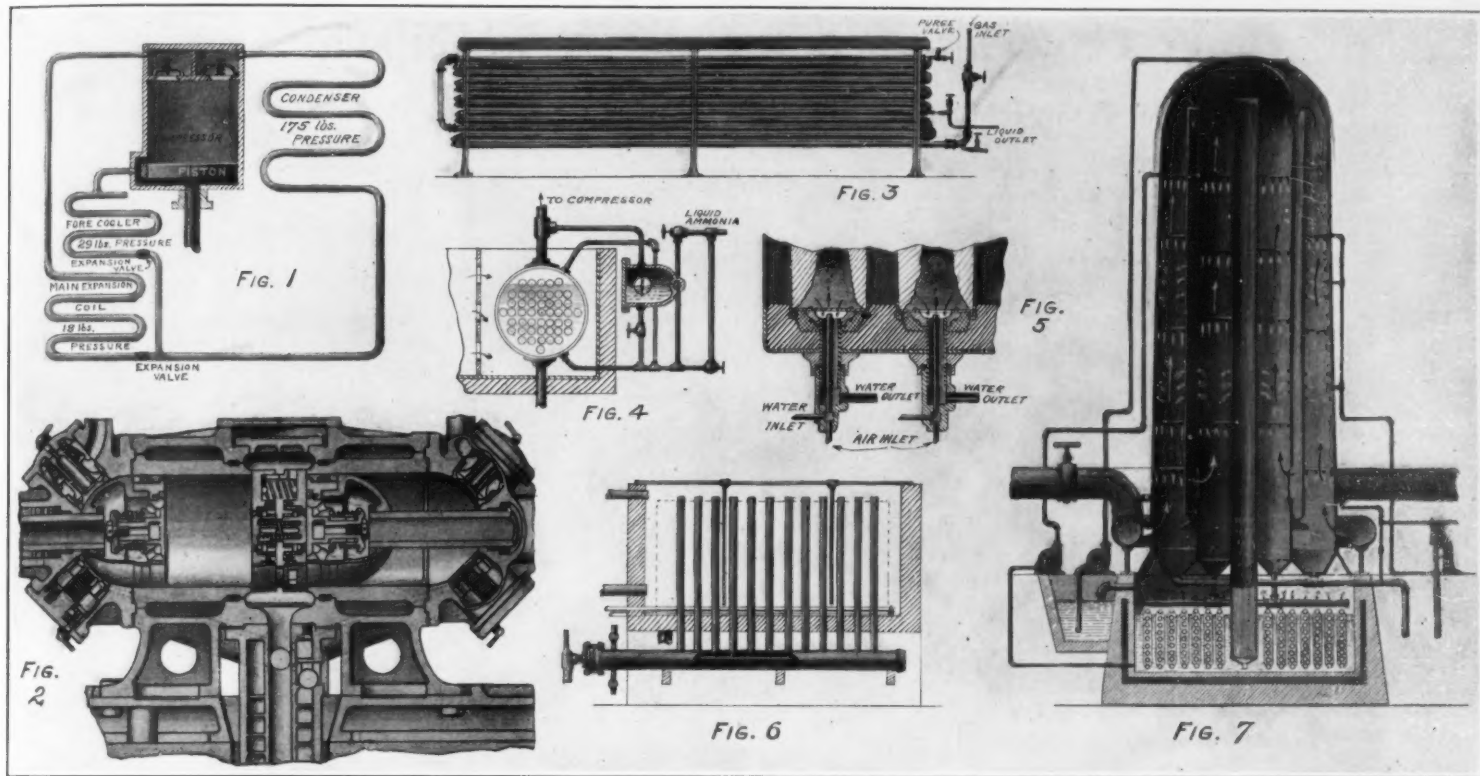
Diagrammatic view of a compression system, consisting of four main parts—compressor, condenser, expansive valve, and evaporator or refrigerator coil. Fig. 2.—Quadruple acting compressor, showing housing of valves in cylinder and pistons for keeping down heat generated during compression. Fig. 3.—Flooded ammonia condenser, atmospheric type. Hot gas is made to enter at bottom of coil instead of top. Fig. 4.—Section of shell brine cooler of flooded type in which brine to be cooled is forced through the pump tubes. Fig. 5.—Large detail section of freezing can employing raw water. Fig. 6.—Apparatus whose refrigerant may be brine or liquid ammonia. Ice increases in thickness in greatly reduced time around the tubes until the various masses meet and coalesce to form continuous cake. Fig. 7.—The use of refrigeration in drying of air for blast furnaces. One of the latest forms of cooling towers for this purpose.
